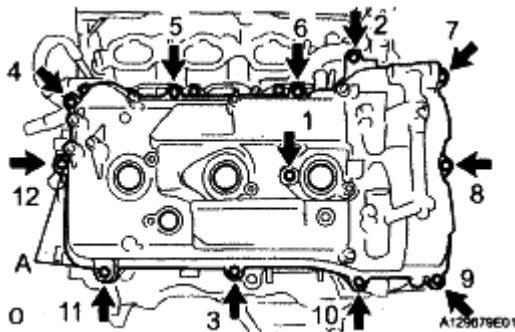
Identifying Head Cover Bolts Tightening Sequence
